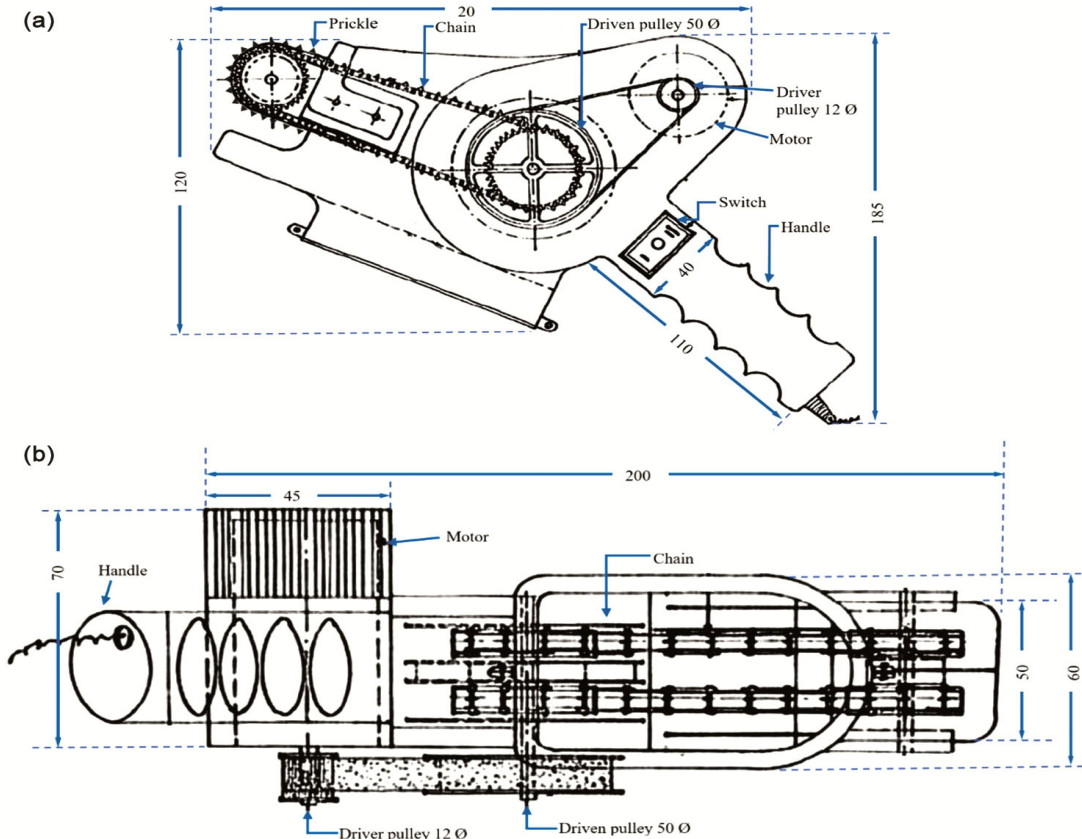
CAD view of the chain-type end-effector illustrating (a) the side view showing the prickles arrangement on the chain drive and (b) the top view depicting the attachment of two chains to the driven pulley; dimensions in mm.
